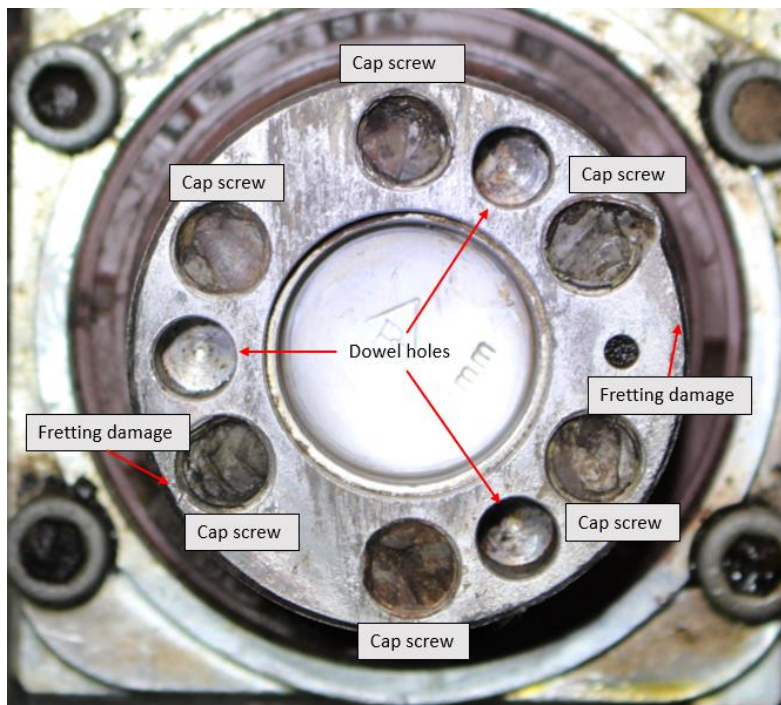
Crankshaft to propeller flange face detail (CAA photo)
